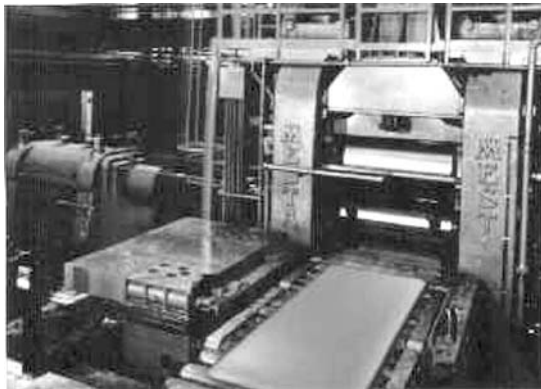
“Four-high” plate mill shown in the process of rolling a large plate, about 4 m long (courtesy RMI)
